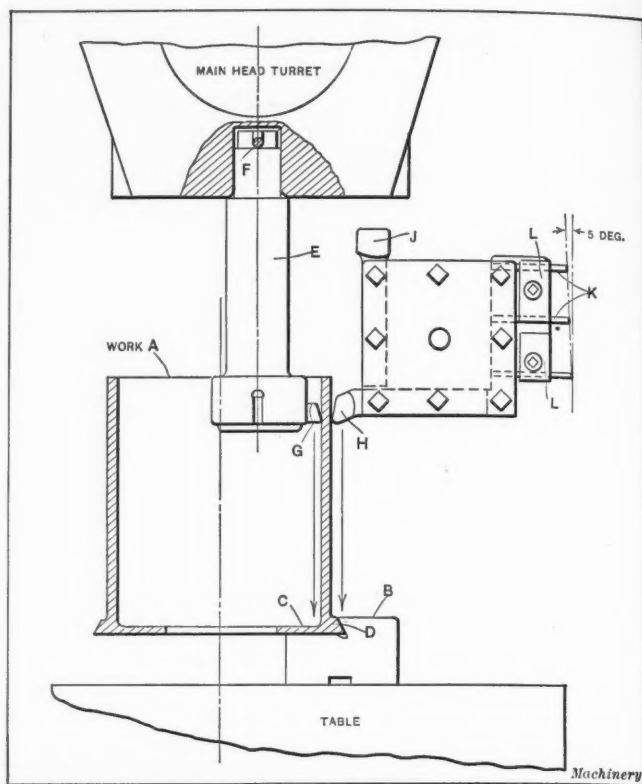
Machining a Thin Casting to be cut up into Rings on the Vertical Turret Lathe
